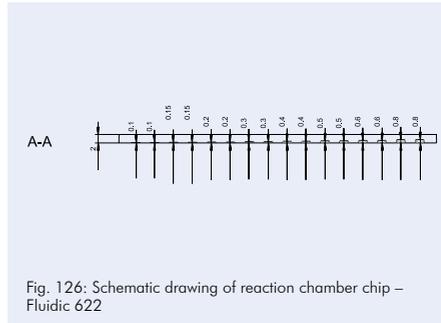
Schematic drawing of reaction chamber chip – Fluidic 622
